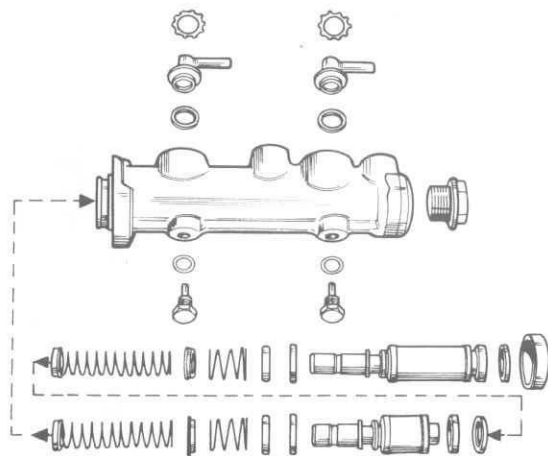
8 Master cylinder parts exploded. These may be identified in FIG 10:9
